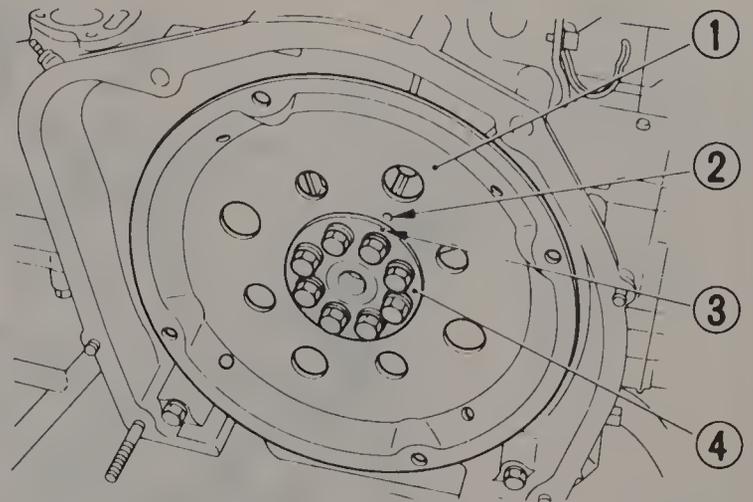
When installing the driveplate (automatic transmission vehicles), be sure to line up the back plate properly (Sec 7)
